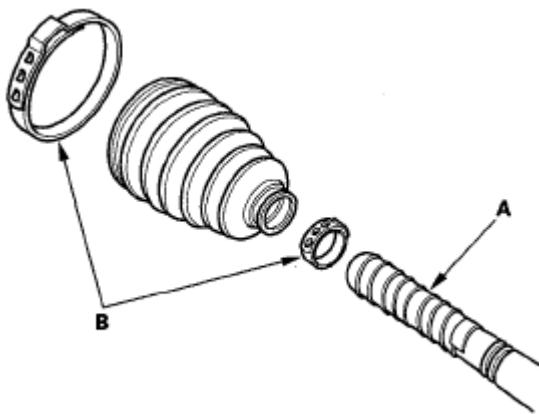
Wrapping Driveshaft Splines With Vinyl Tape
